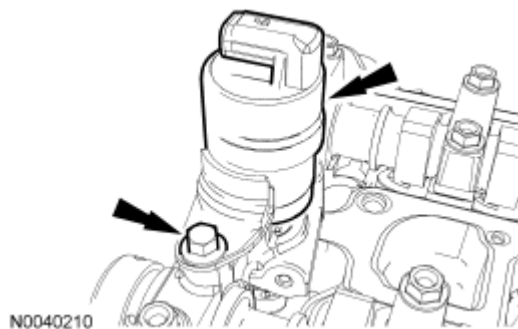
Locating Variable Camshaft Timing (VCT) Solenoid And Bolt
